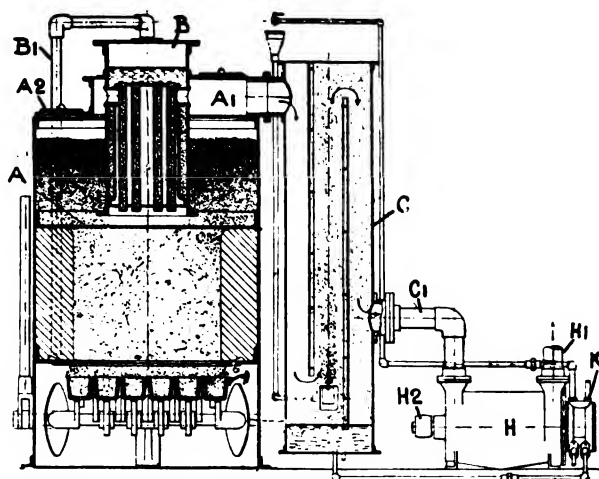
The Capitaine Suction Gas-producer. Sectional elevation through producer and the cooler, showing the arrangement of the boiler, B, inside the former.
